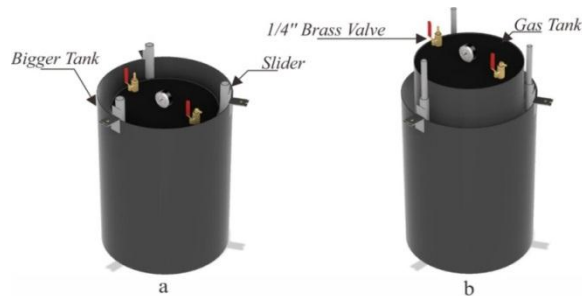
Hydrogen gas storage tube design: (a) the tube sinks empty and (b) the tube floats when filled with gas.
